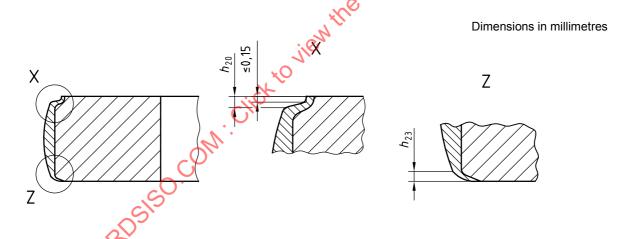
Chromium plated ring fully faced, reduced peripheral bottom edge — Code: KU
